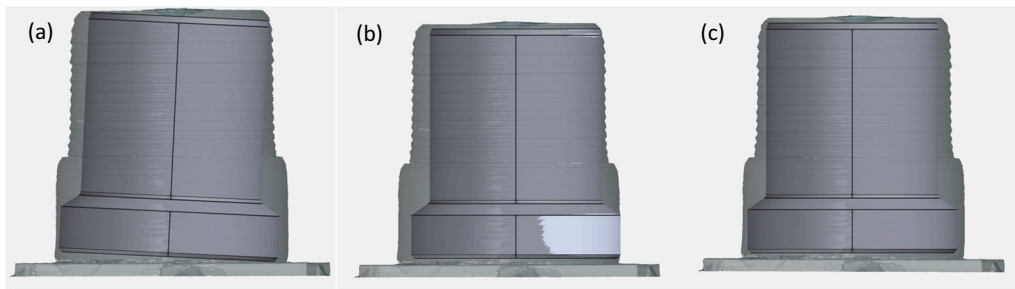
(a) An alignment where the part is fully contained inside the preform, but which is not physically attainable on a three-axis milling machine since the part is tilted with respect to the base. (b) An alignment which is physically attainable since the build plate is perpendicular to the vertical (Z) axis, but where the part isn't contained inside the preform. (c) A good alignment where the part is fully contained inside the preform and the alignment is physically attainable on the machine tool since the build plate is perpendicular to
